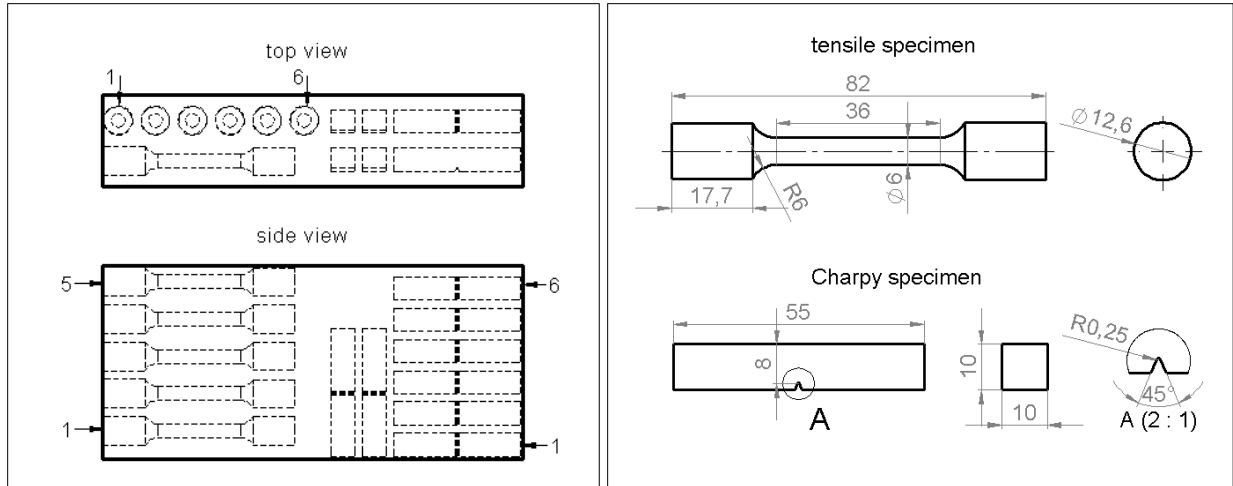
(left) Graphical representation showing the location and the numbering of the tensile and Charpy specimens inside the block produced at RAMLAB. (right) Design of the tensile specimens (upper part) and of the Charpy specimens (bottom part) in mm.
